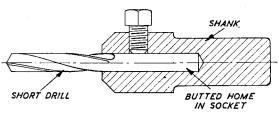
Short twist drill mounted in stub holder to fit capstan head.
